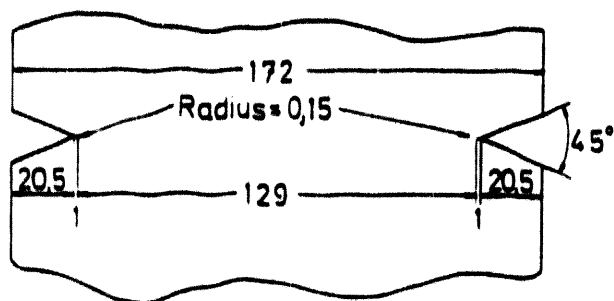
Geometry of the side grooves (part B in Fig. 6)
